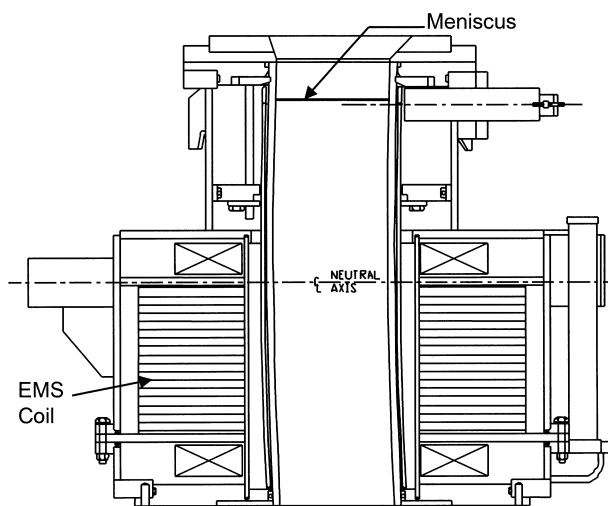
Schematic of a short-core M-EMS arrangement in a mold housing.
